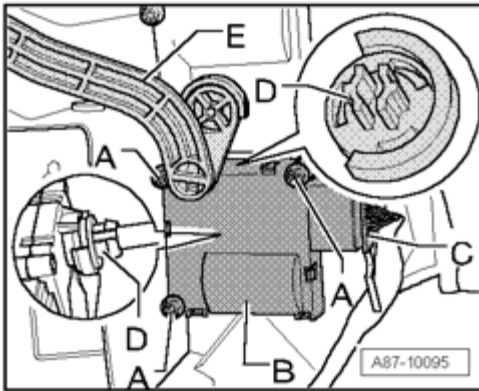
Identifying Connector, Bolts, Connecting Element, And Control Motor
